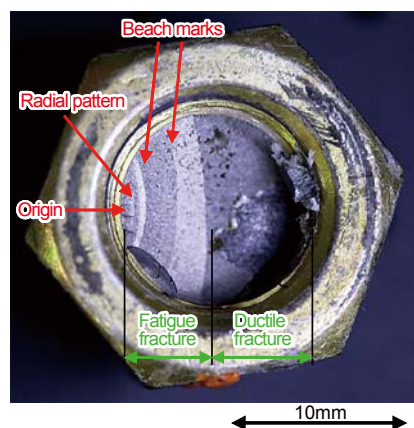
Macroscopic observation of part which suffered fatigue fracture.
